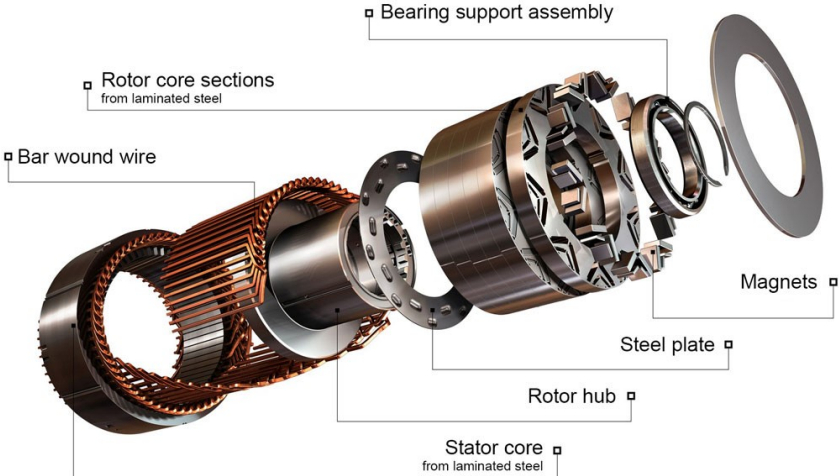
Exploded view of GM’s interior permanent magnet motor used on the Chevy Bolt.
